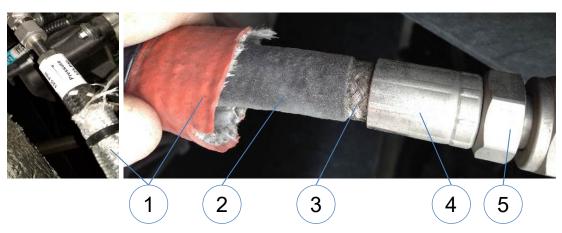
If hose is covered with a fire sleeve (1) or split loom, remove sleeve or loom to enable inspection of hose cover (2), braid (3), collet (4) and fitting (5). Always inspect fire sleeve (1) or slip loom for damage.
